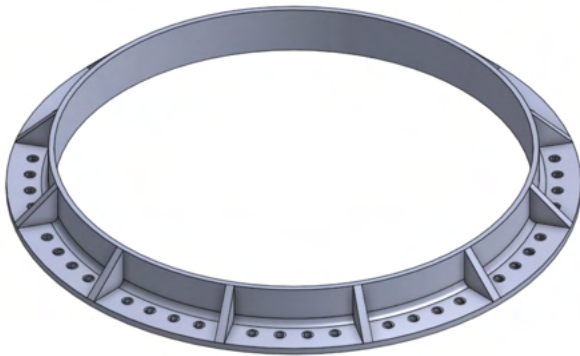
First Base Plate Design With One Layer of Bolts
